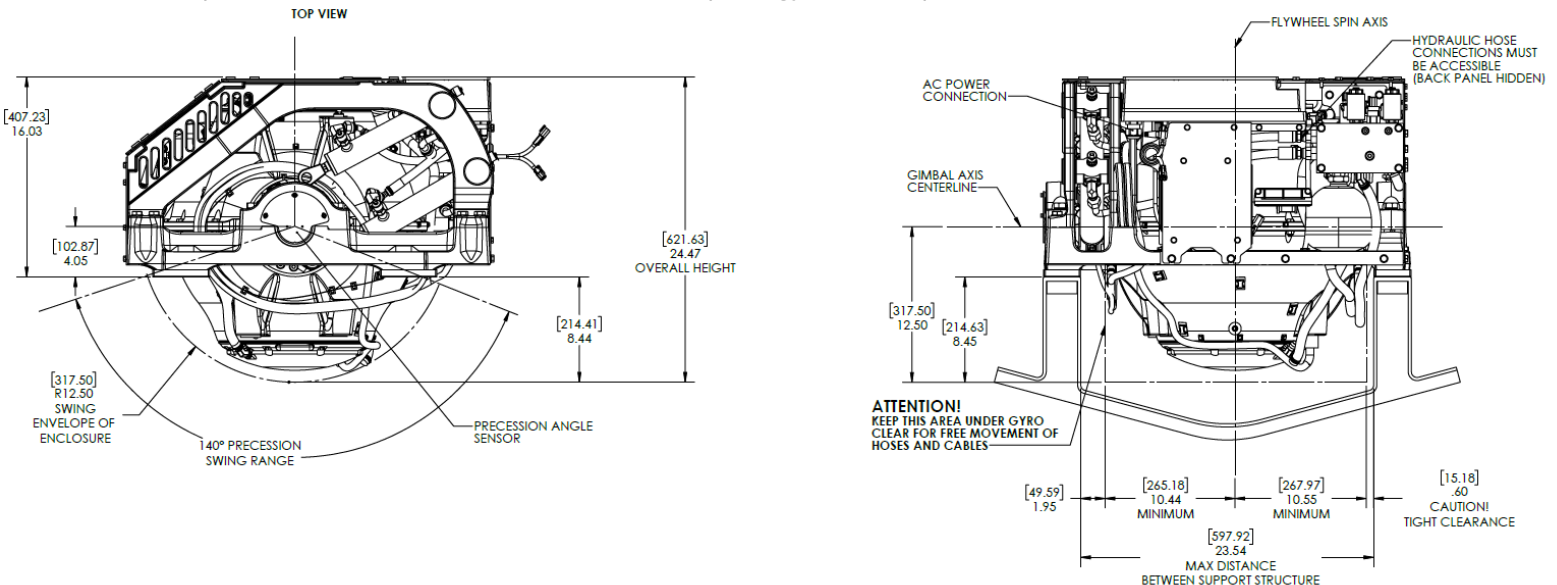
Seakeeper 5-6 Clearance Dimensions for Moving Hoses and Cables
